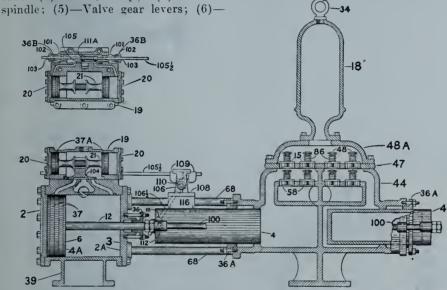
SECTIONAL VIEW OF "BURNHAM" DOUBLE ACTING, OUTSIDE-END-PACKED PLUNGER PUMP.
